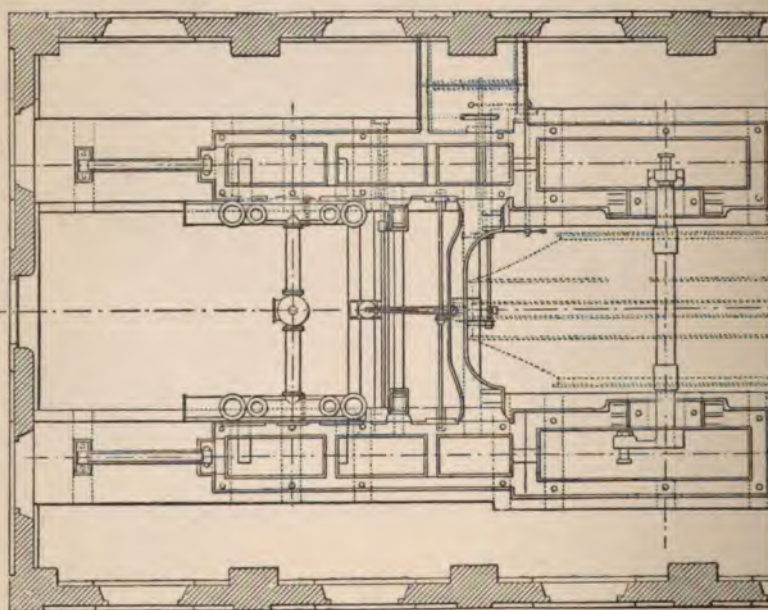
PLAN. Scale 1/4" = 1'-0".
